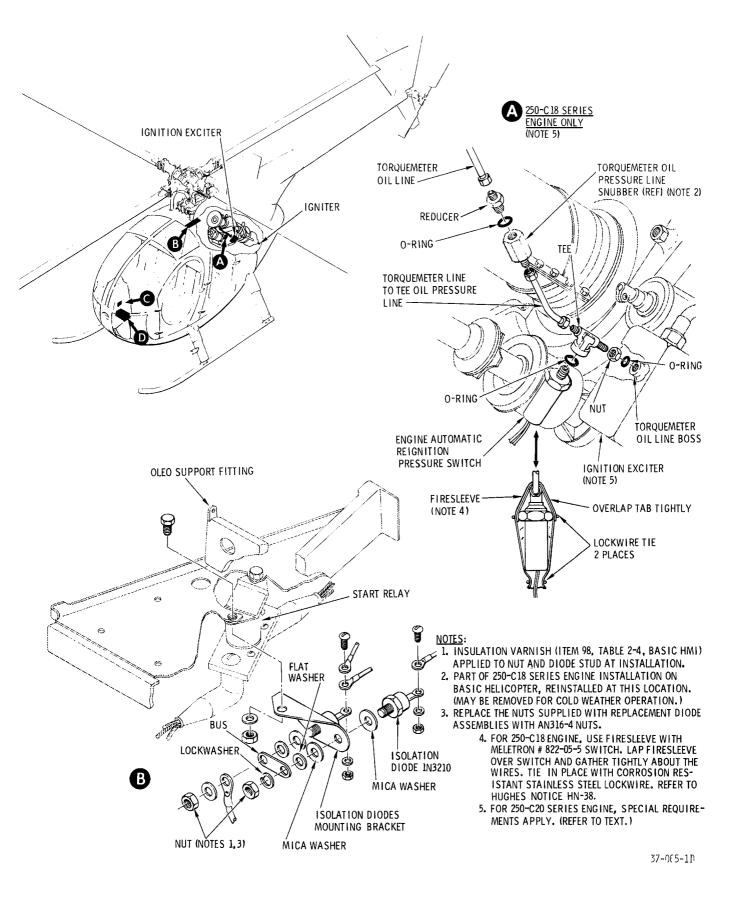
Engine automatic reignition equipment (sheet 1 of 2)
